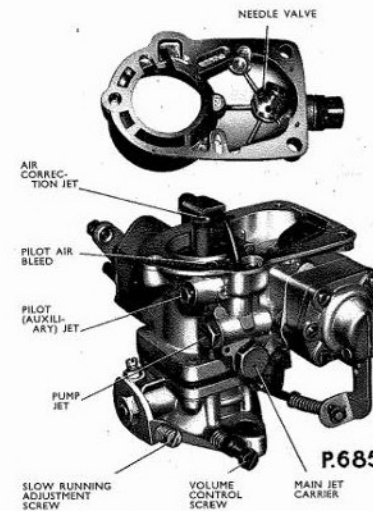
Rear view of the carburettor, showing the jets and slow running adjustment screws
